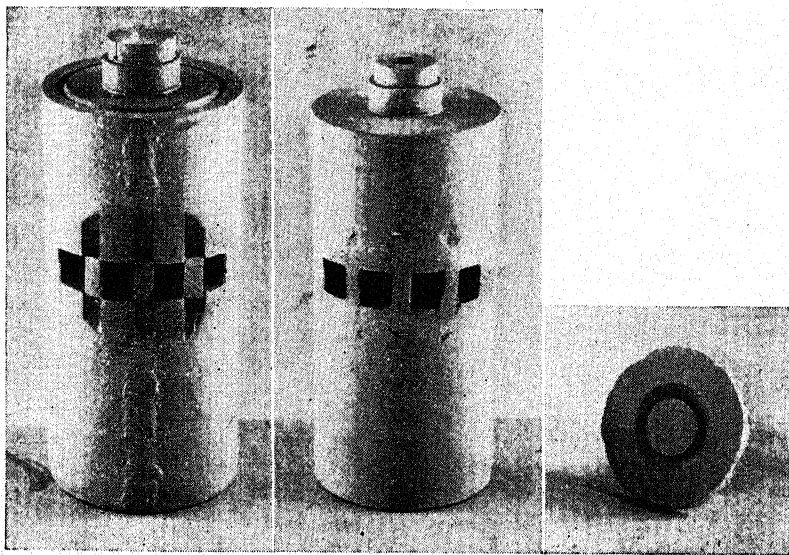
left, ports beveled for welding bridges and bridges in place ready for welding; center, cylinder head and bridges welded in place; right, rough cylinder head with stud in place ready for welding.
